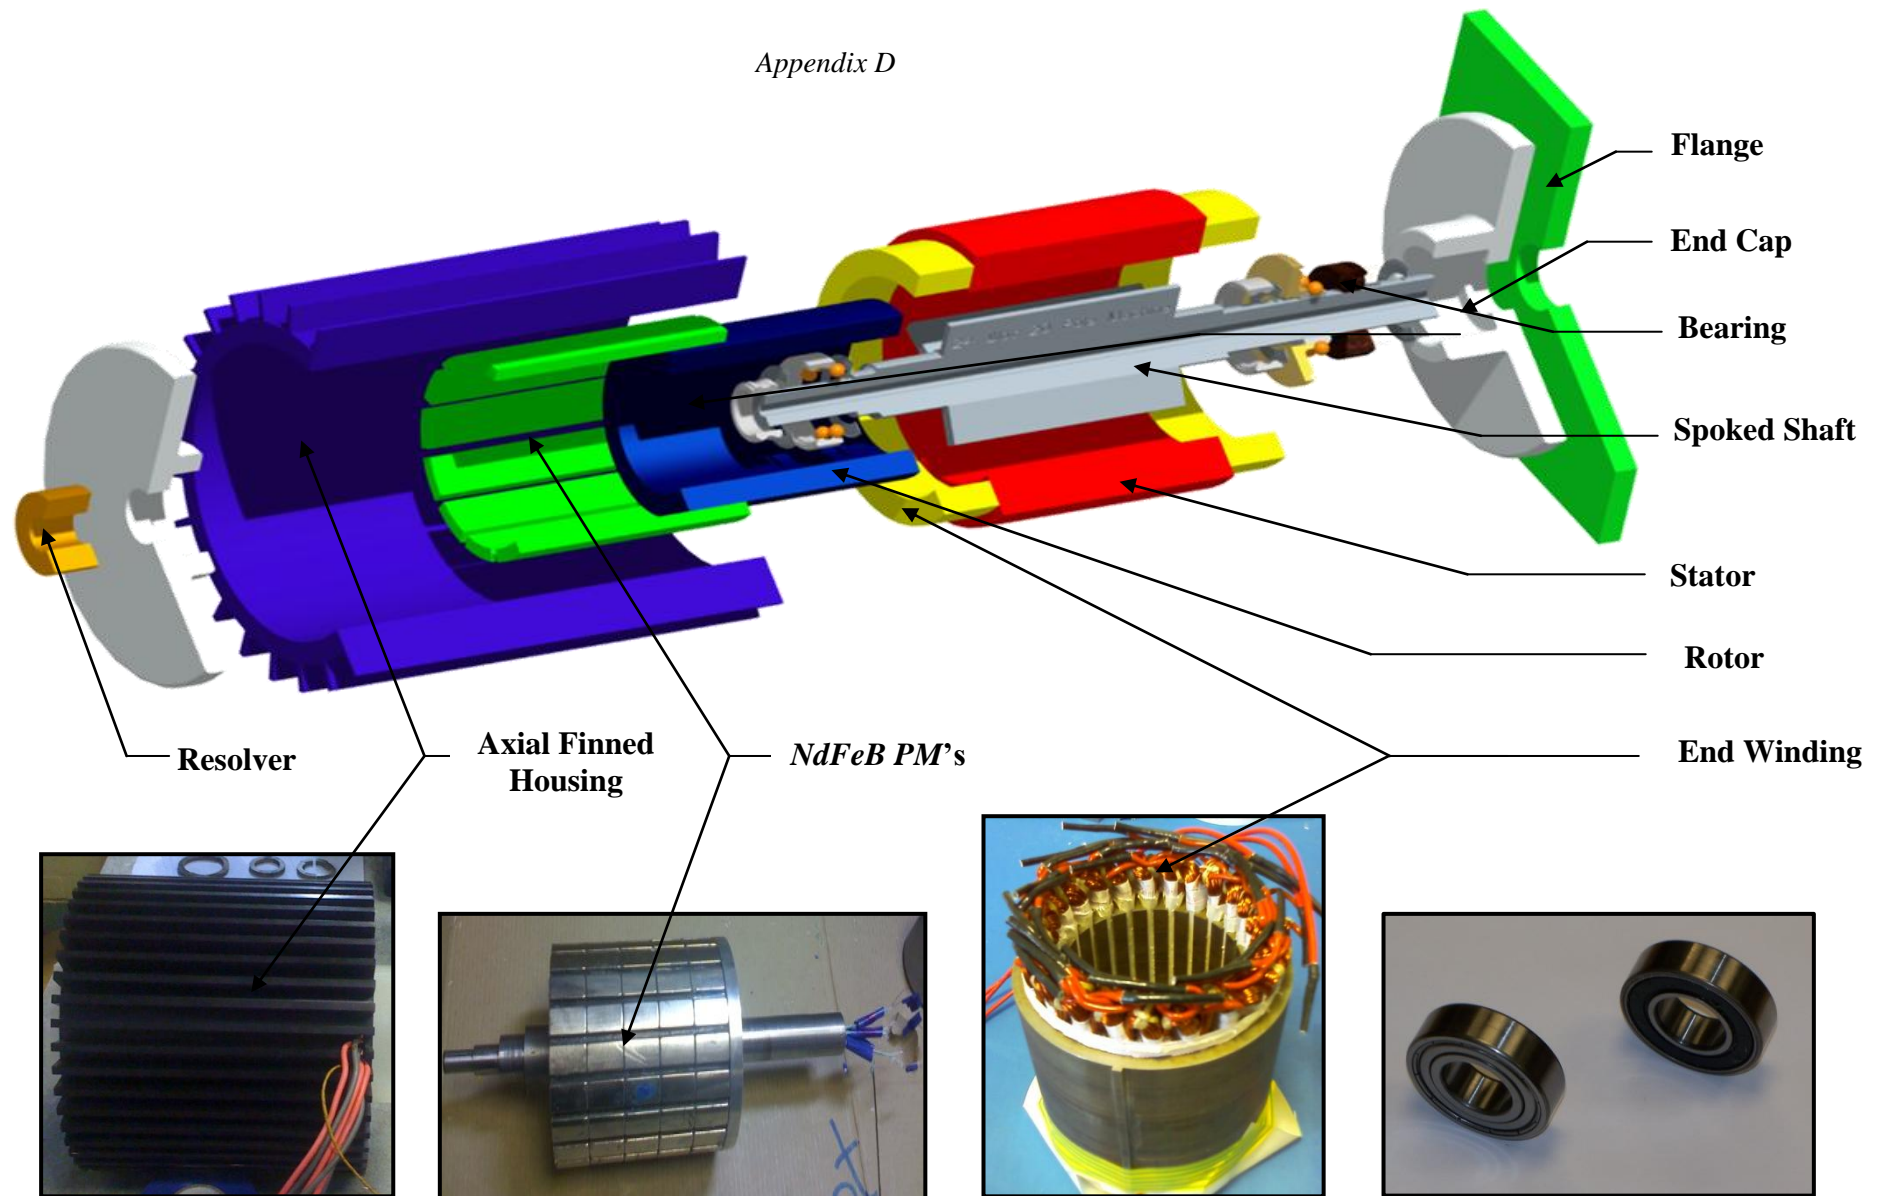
Constituting Components of the Fabricated *PMSM*- Exploded View
